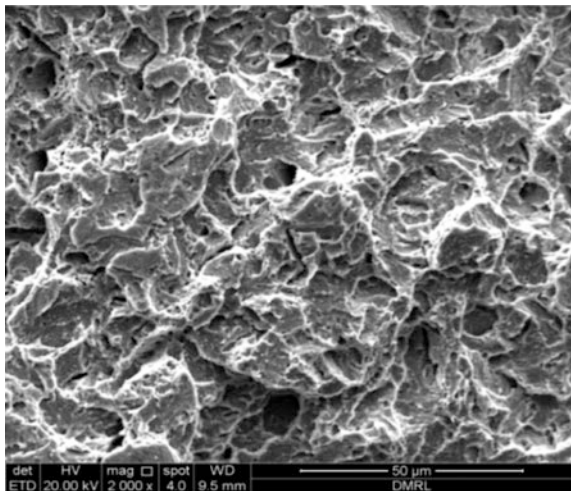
SEM fractograph showing a ‘quasi-cleavage’ fracture
